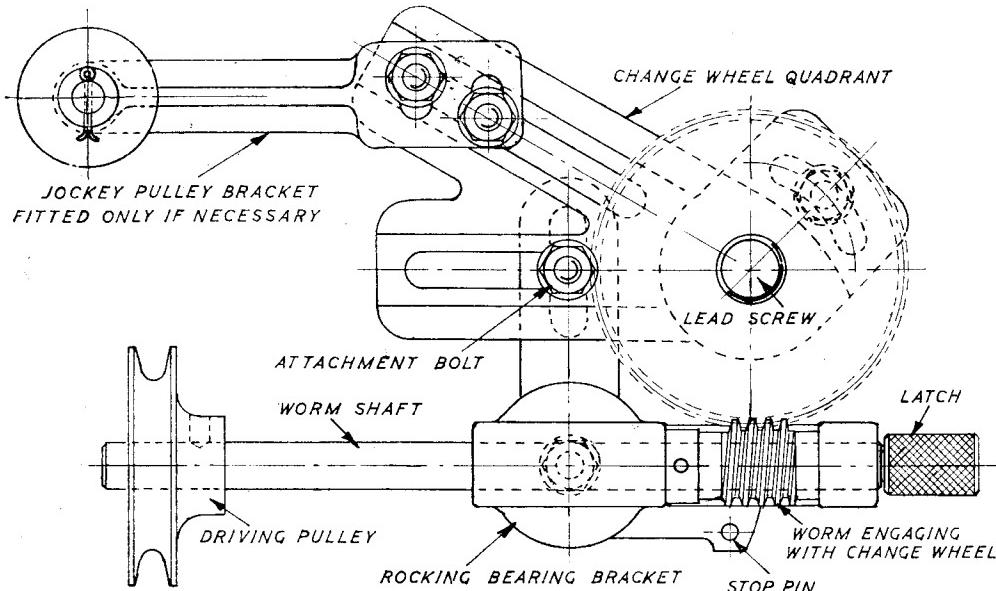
Elevation of the attachment, mounted in position on the change wheel quadrant, viewed from the headstock end of lathe.
